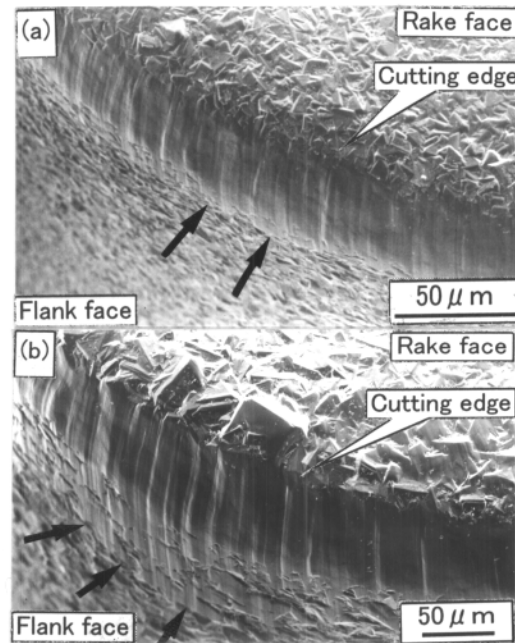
Comparison of the wear mode of cutting edge;(a) the SC100-S tool and (b) the SC100-L tool
